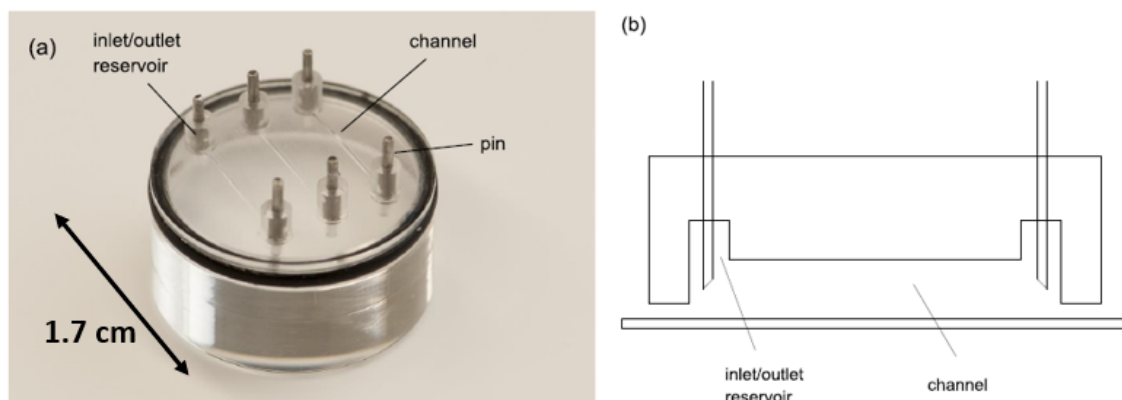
(a) The Plexiglas mould used to form the microchannels. The diameter of the mould is 1.7 cm. (b) The PDMS that was cast into the mould shown in (a) is bonded to a 5 cm glass-bottom culture dish with a partially cured layer of PDMS, and polyethylene tubes are inserted into the inlet and outlet reservoirs to form the full microchannel assembly [22].
